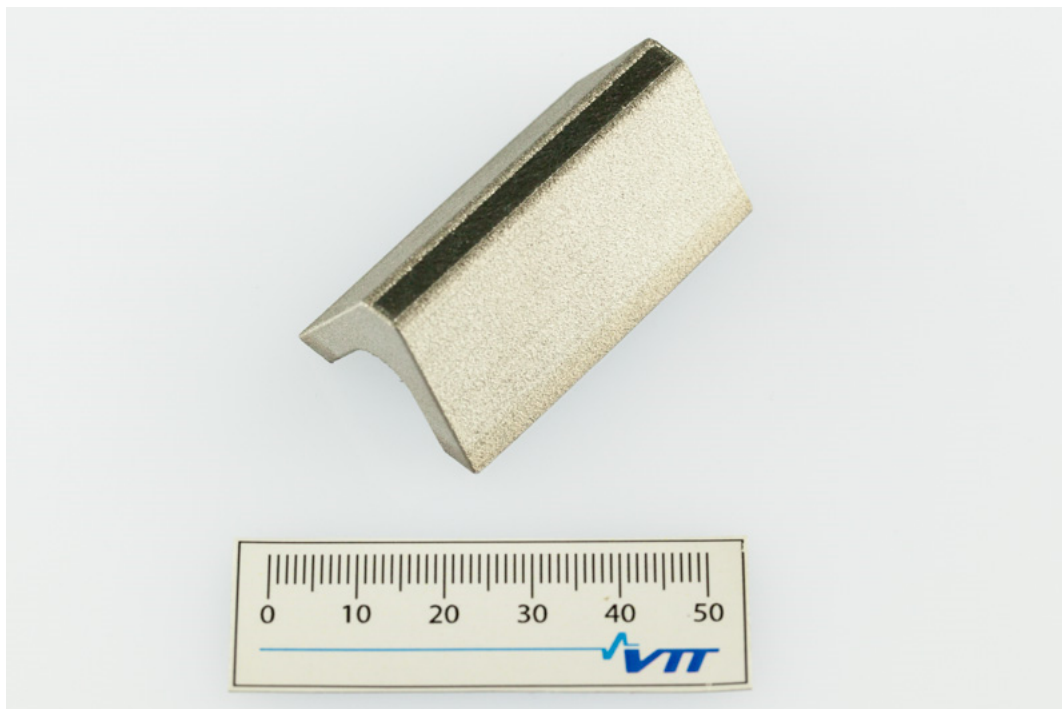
The branched inclined test geometry printed in H13 tool steel at 30 μ m layer thickness.
